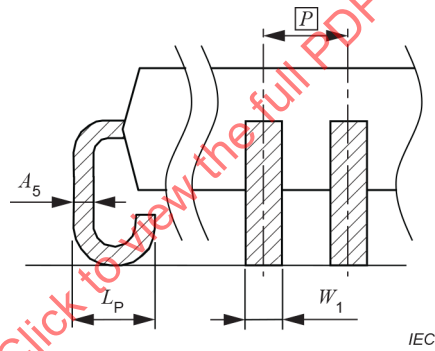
Definitions of dimensions of the flat bottom terminal types
